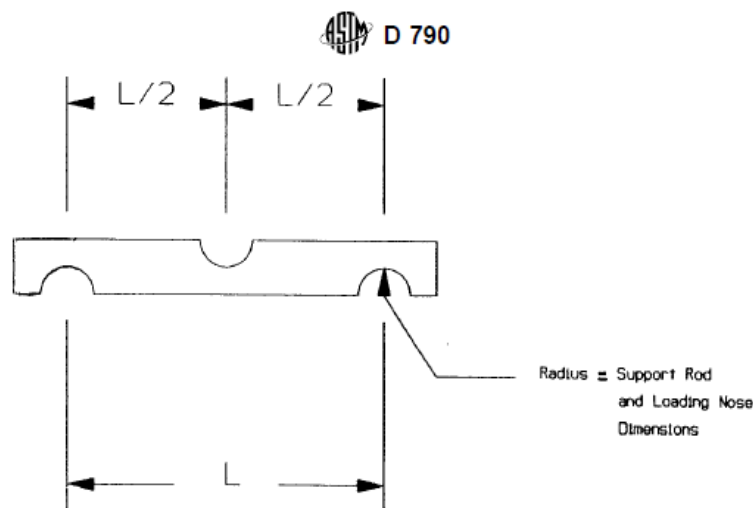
Fixture Used to Set Loading Nose and Support Spacing and Alignment
